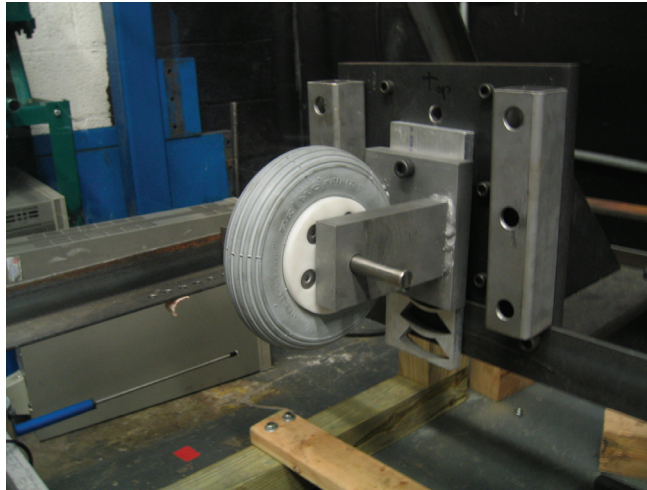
Close-up photograph of the custom fixture for CDL on the impact tester
